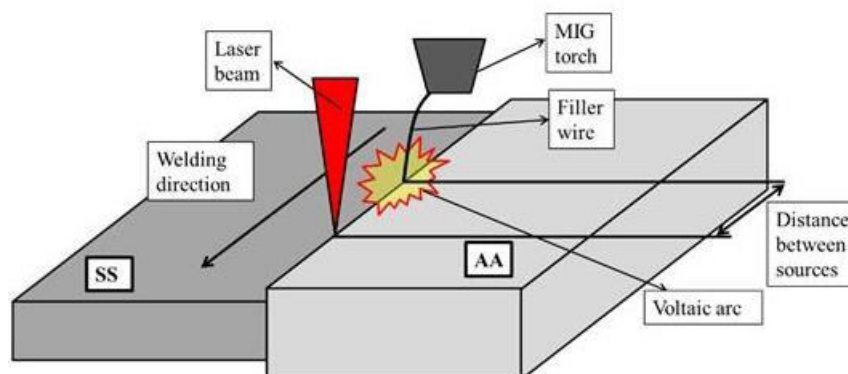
Laser offset welding configuration (LOW) [155].
